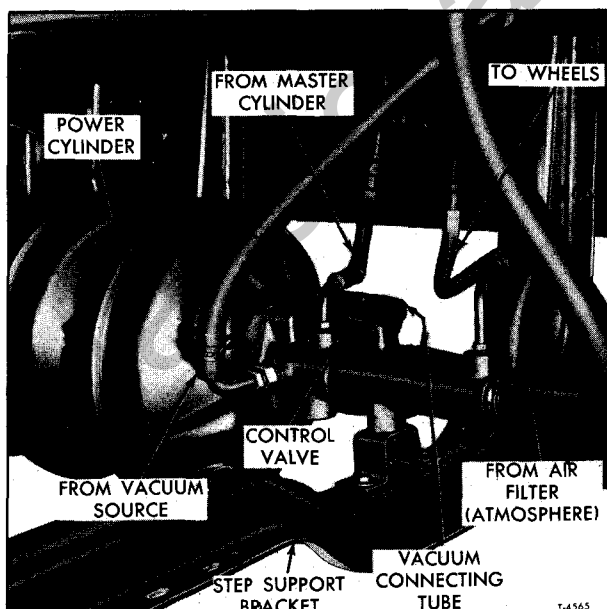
Power Cylinder Installed (Conv. Cab Models)
